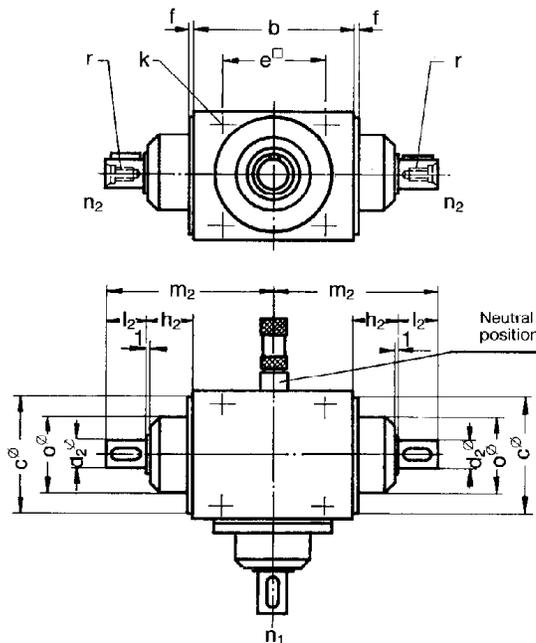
Spiral bevel reversing gearbox without pinion shaft  $d_1$ .
